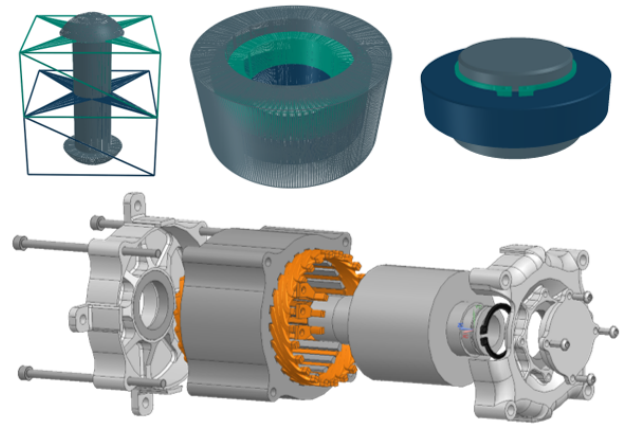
Test cases for validation experiments. Left: Rivet joint. Middle: Parts in housing. Right: Locking ring. Bottom: Complex motor assembly.
